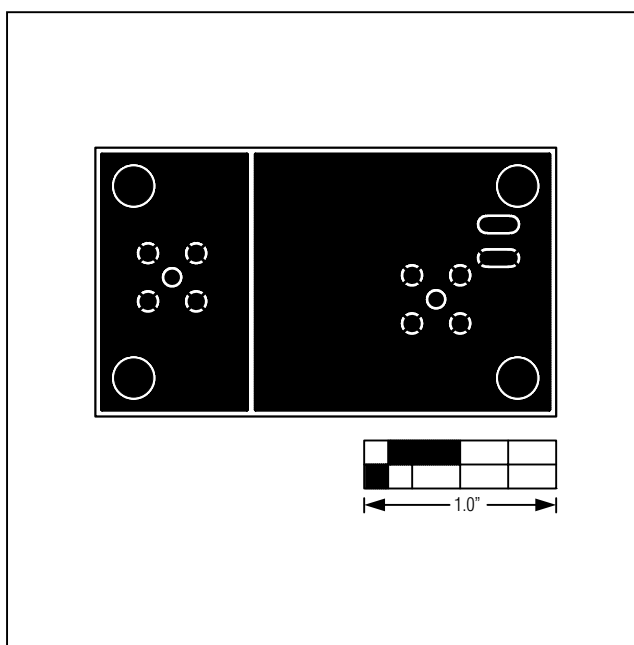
MAX9622 EV Kit PCB Layout—Solder Side
